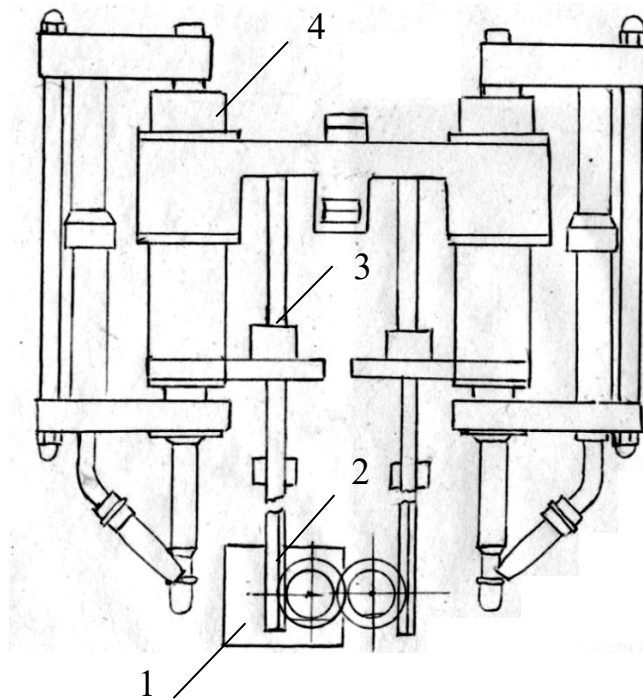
Mechanism of lowering welding heads with rail transmission
